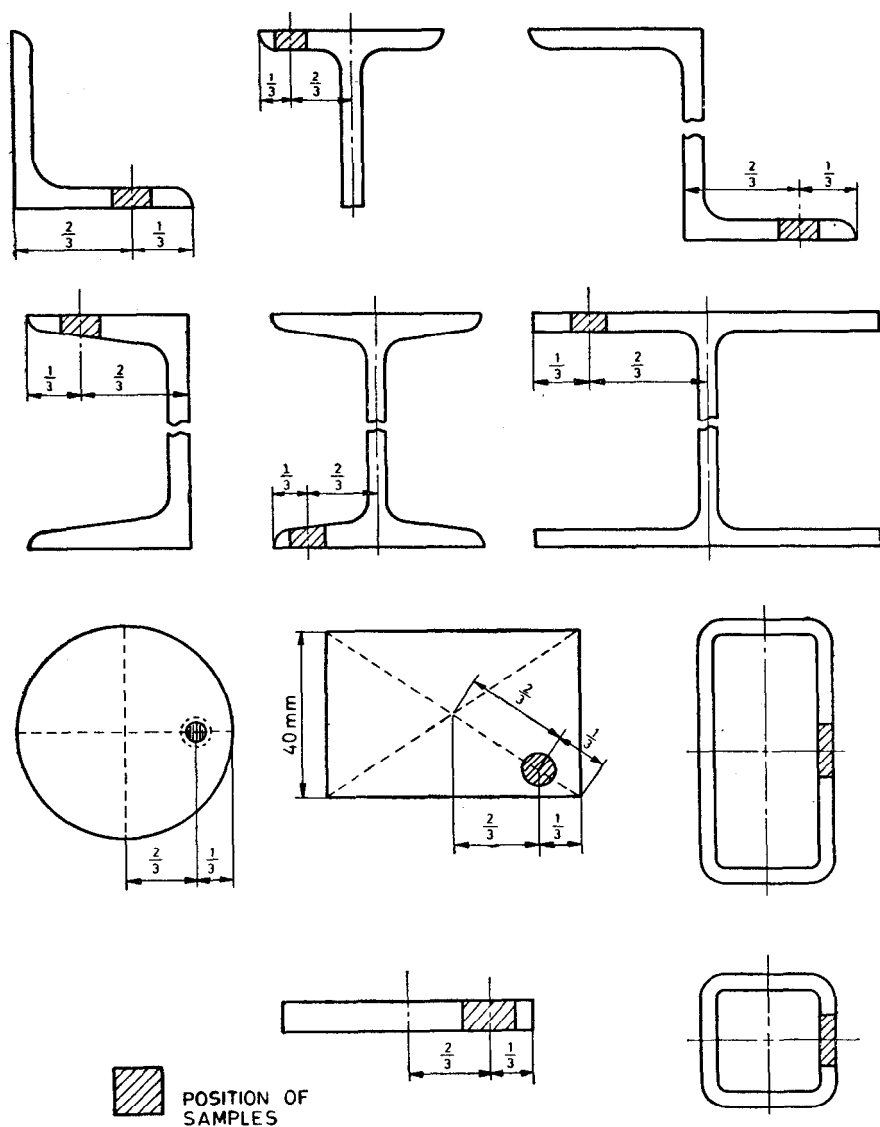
STRUCTURAL STEEL SECTIONS, POSITION AND ORIENTATION OF SAMPLES
